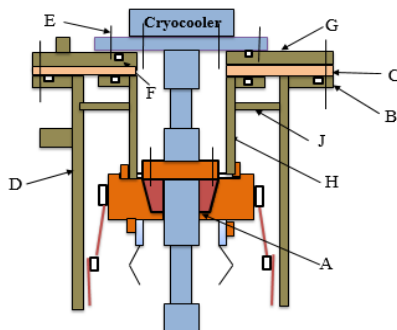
Schematic diagram of sock assembly with problems in assembly of the cryocooler.
